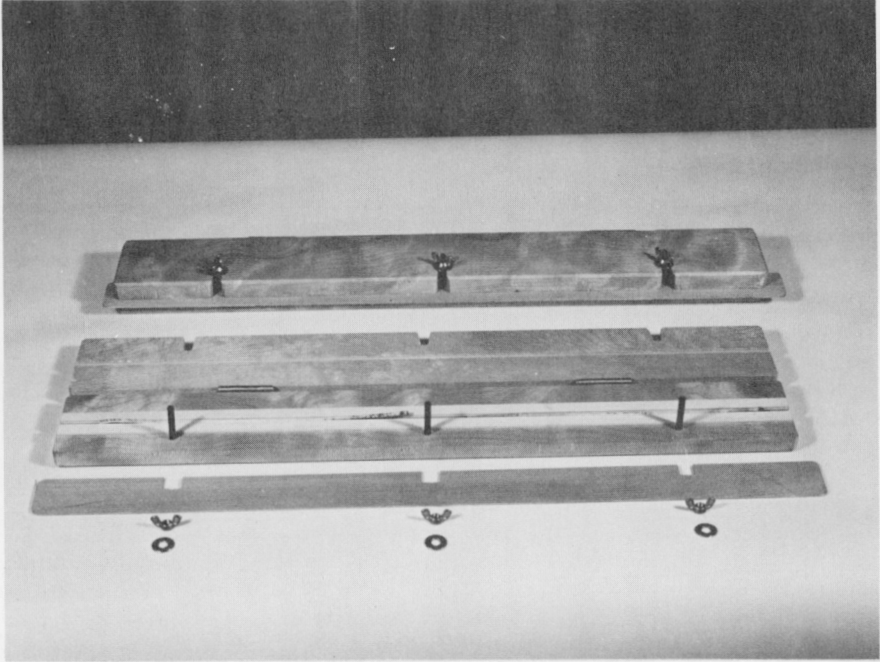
Small core mounting jigs (26 inches long). (G.S.C. photo 201334-H)
